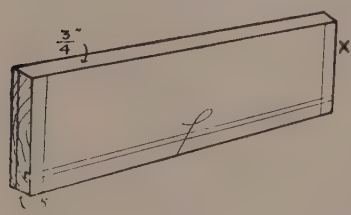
DRAWER FRONT: MARKING WITH CUTTING GAUGE. FIG. 2. DRAWER SIDE: MARKING WITH CUTTING GAUGE.
